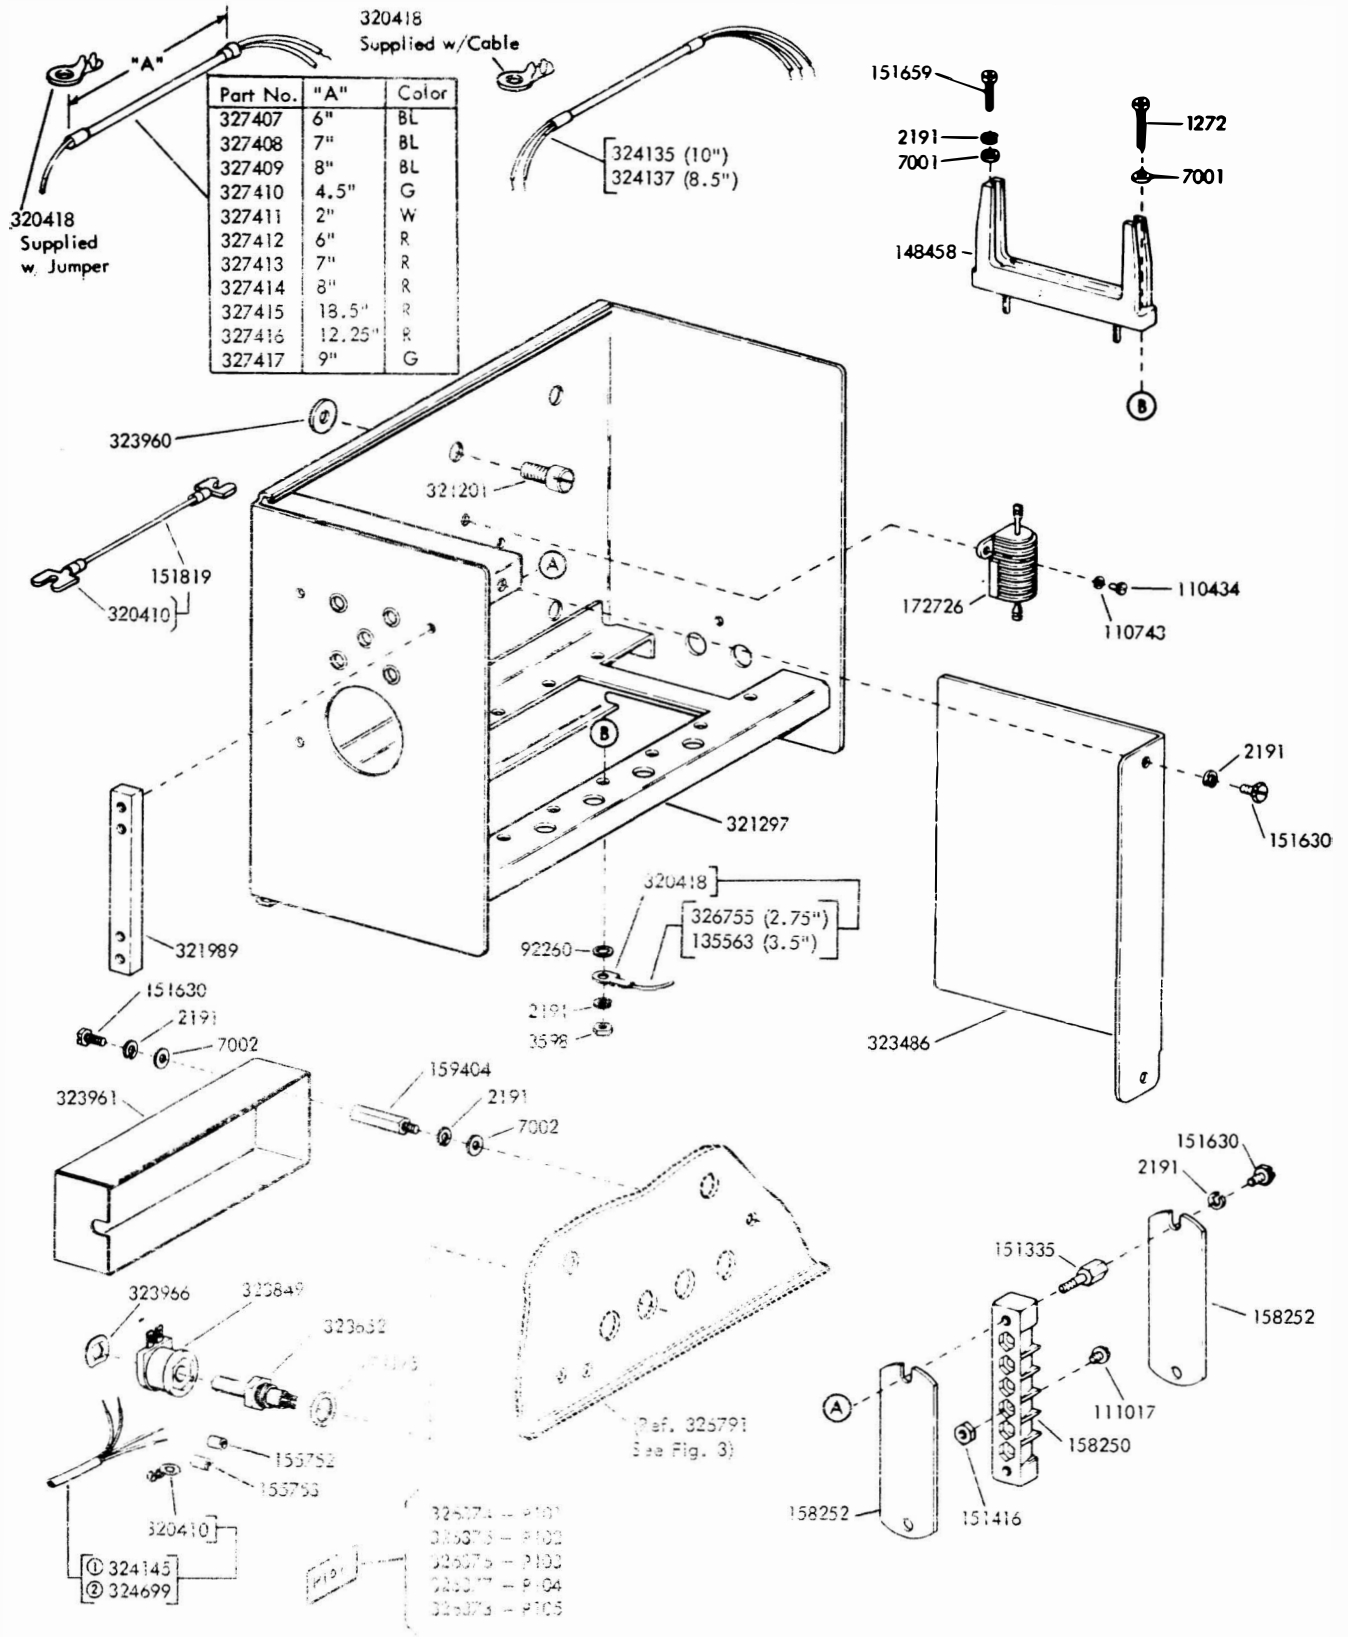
323821 ELECTRICAL SERVICE ASSEMBLY (Continued)
